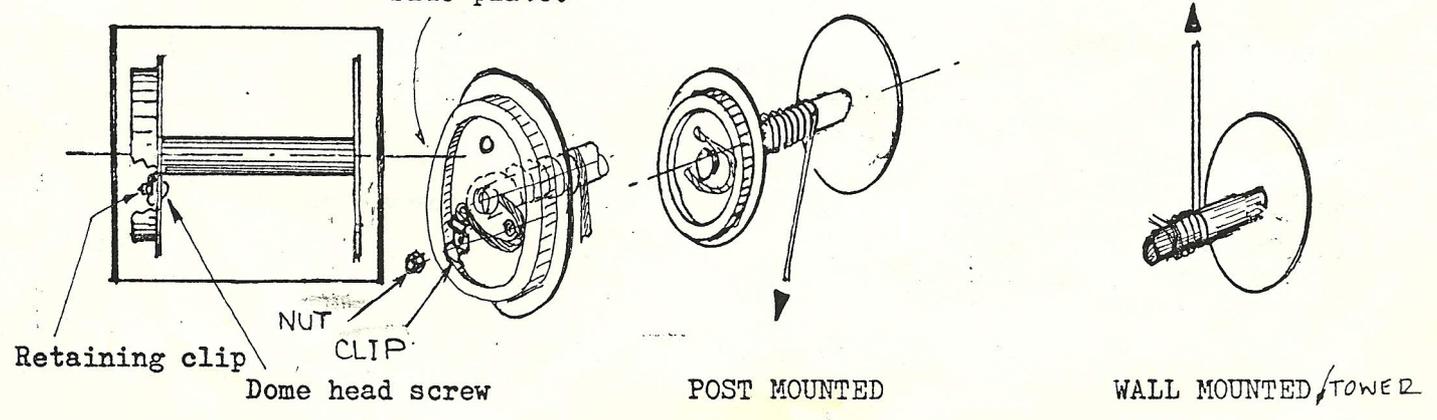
ASSEMBLY TO SECTION L3.
